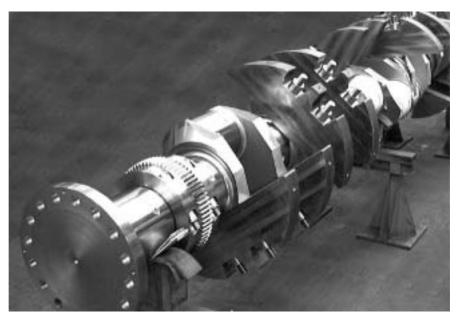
Crankshaft with camshaft drive gear and attached counterweights
